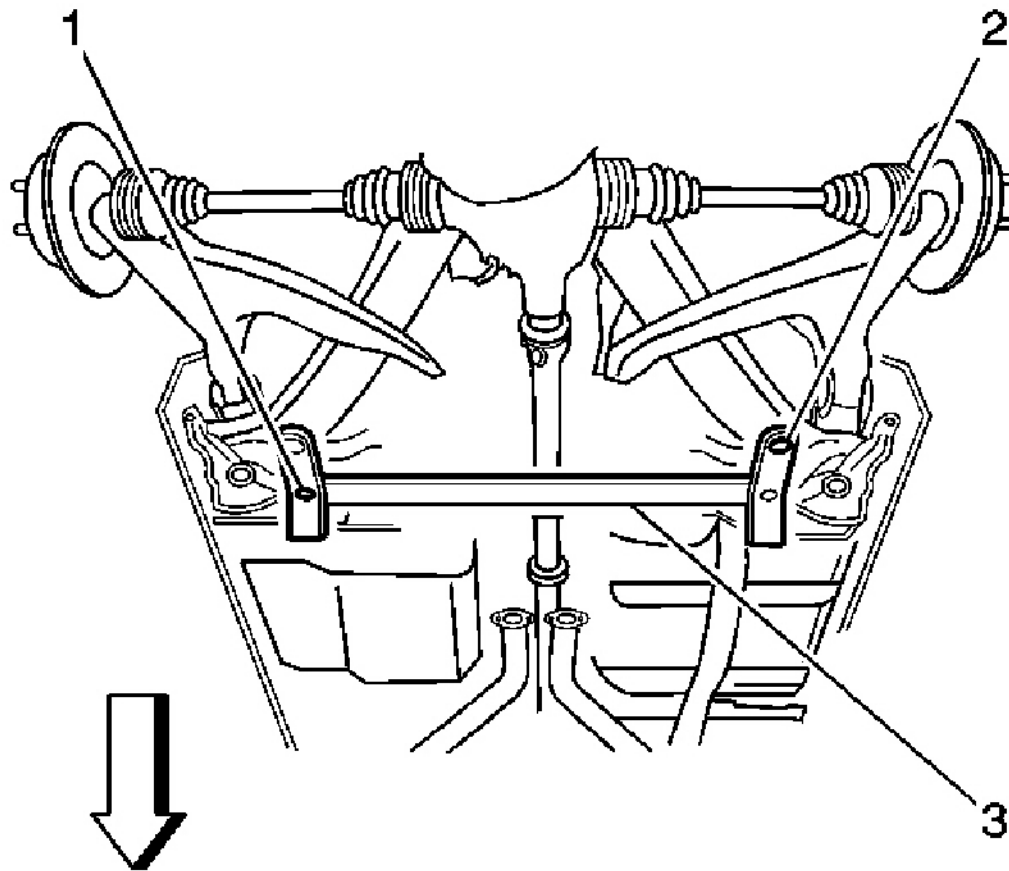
View Of Body Datum Holes, Rear Crossmember Centering Tool & Locations Pins
